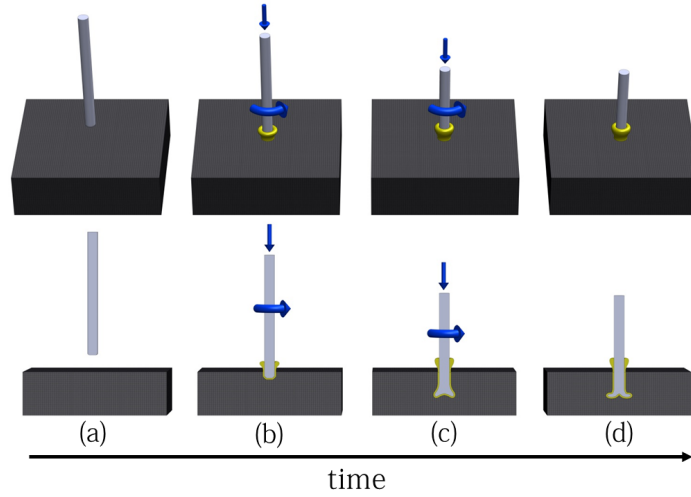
Friction riveting process steps: (a) Positioning of joining parts. (b) Frictional heat creates a molten polymer layer, and the rivet penetrates the polymer. (c) Axial force on the rivet is increased, resulting in anchoring by widening (mushrooming) the rivet tip. (d) Consolidation of the joint
